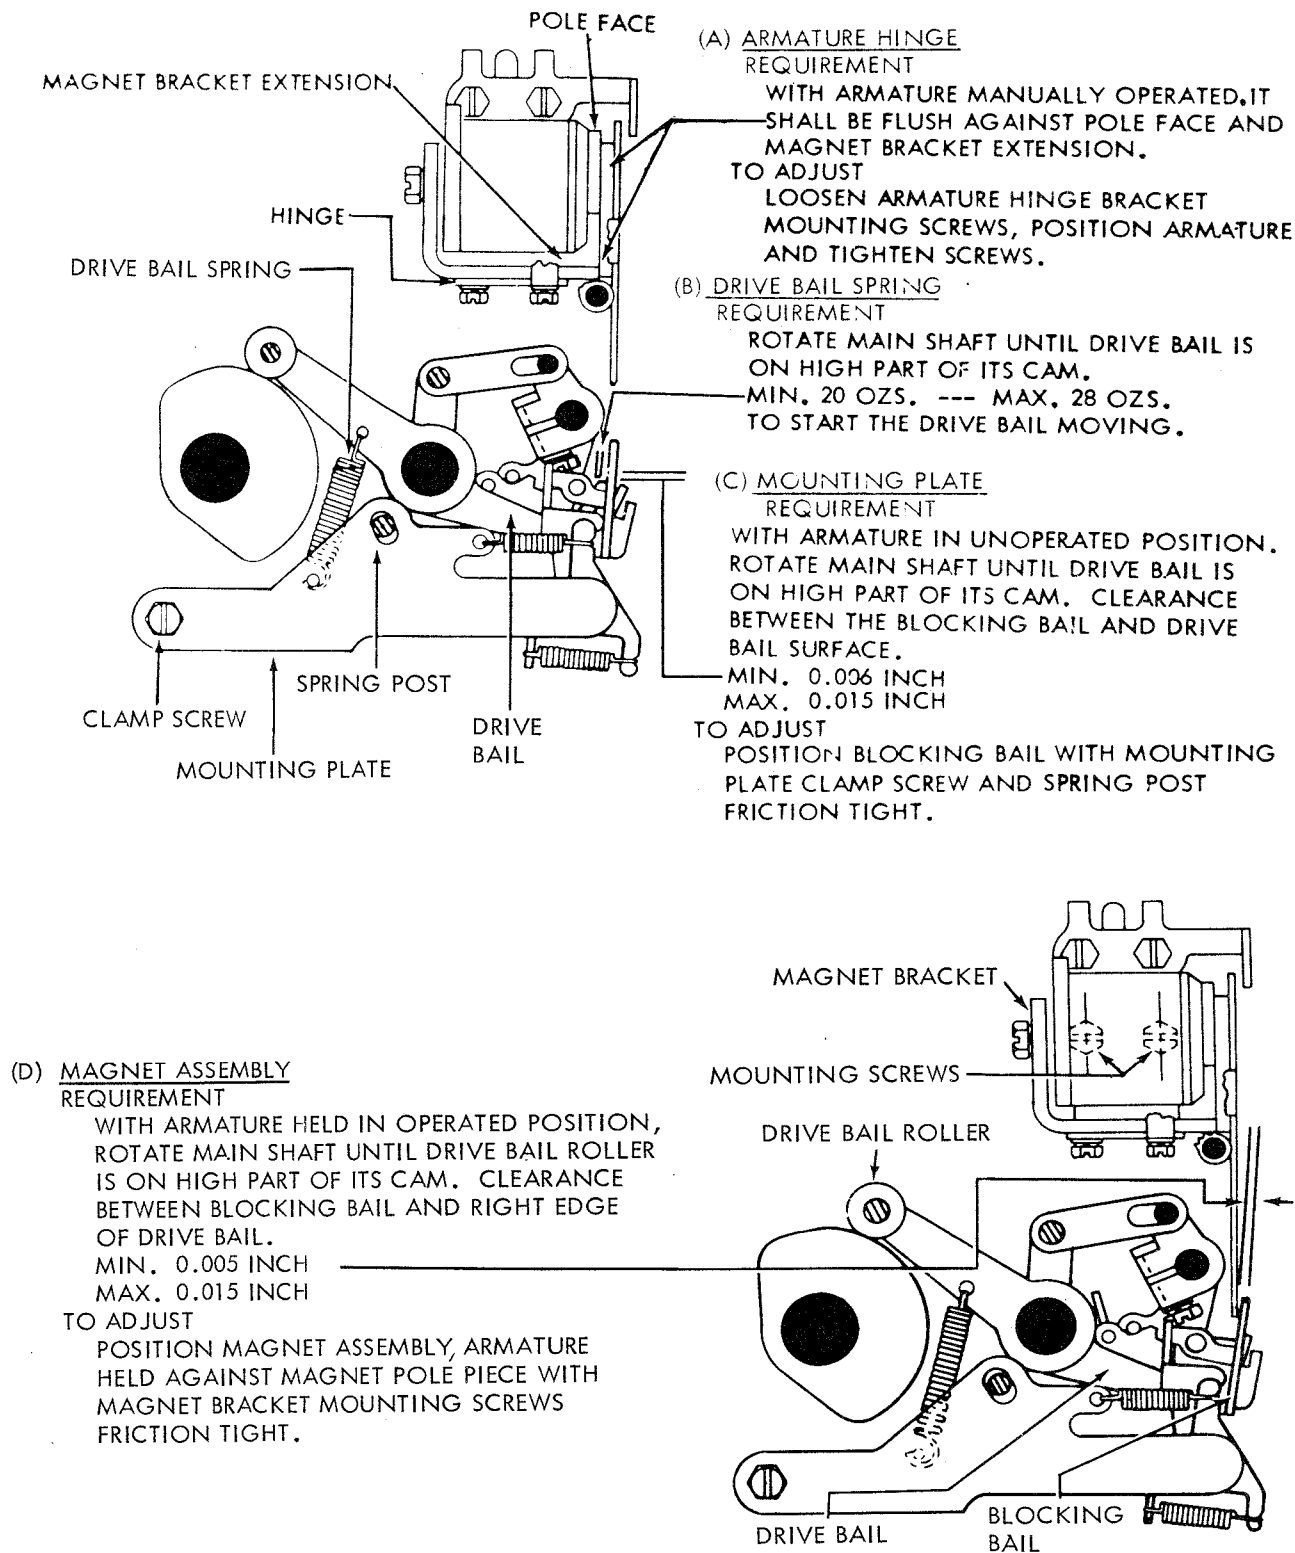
A. TYPING REPERFORATOR TT-375/UG, REMOTE CONTROL NON-INTERFERING BLANK TAPE FEED-OUT MECHANISM - LATEST DESIGN
